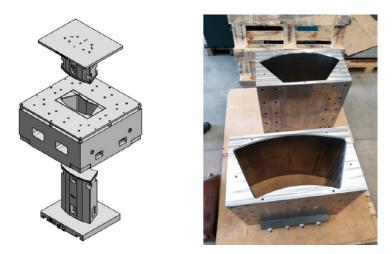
Left: 3-D model of mould for outer segments. Right: Picture from manufacturing.
